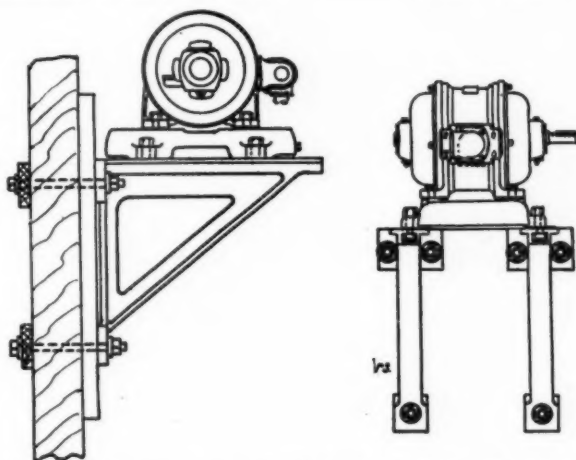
Motor Bracket Made from Line Shafting Hangers
